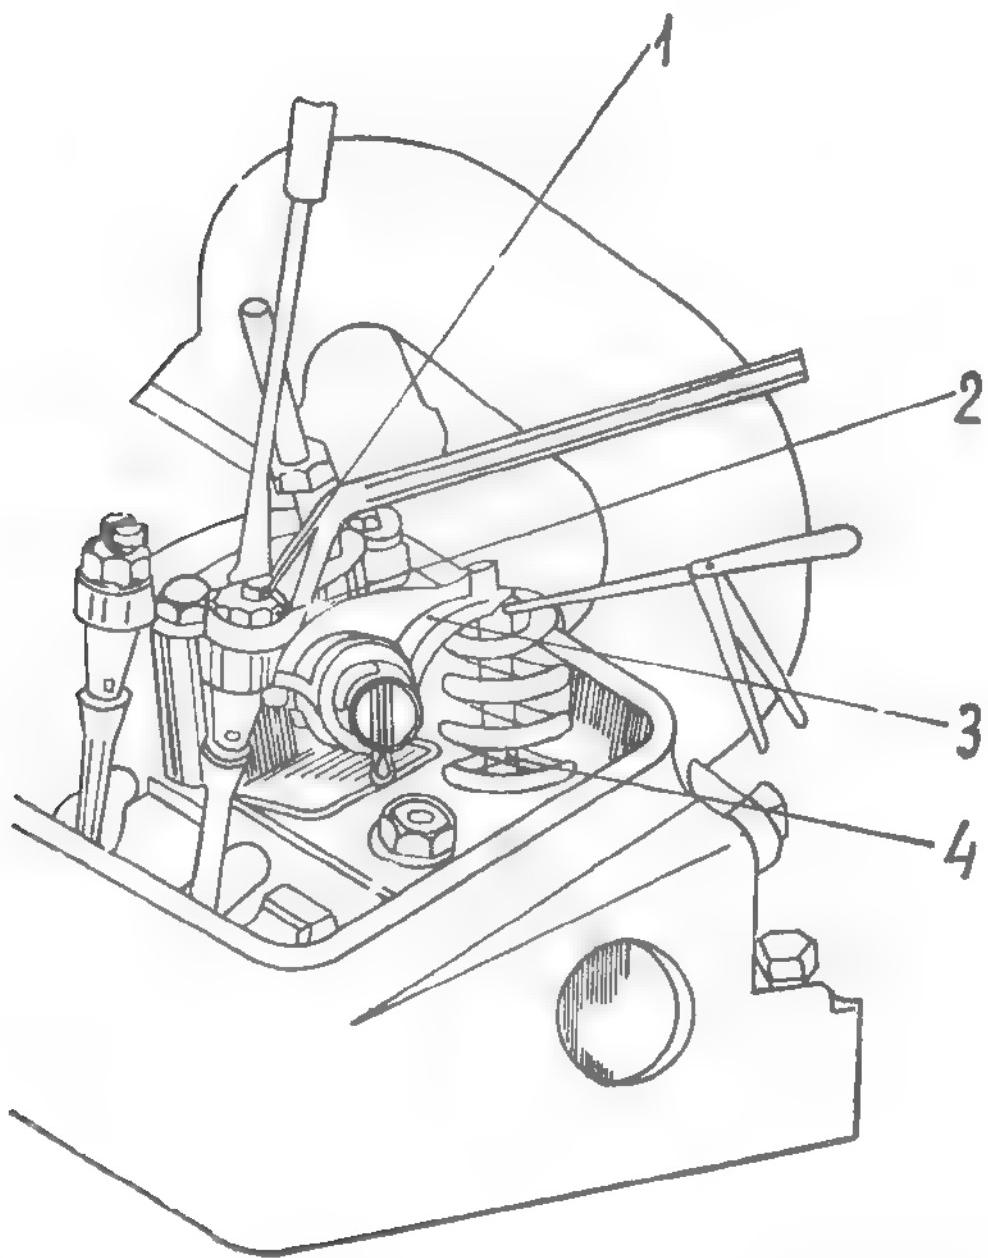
ADJUSTING CLEARANCE BETWEEN VALVES AND ROCKER ARMS.
